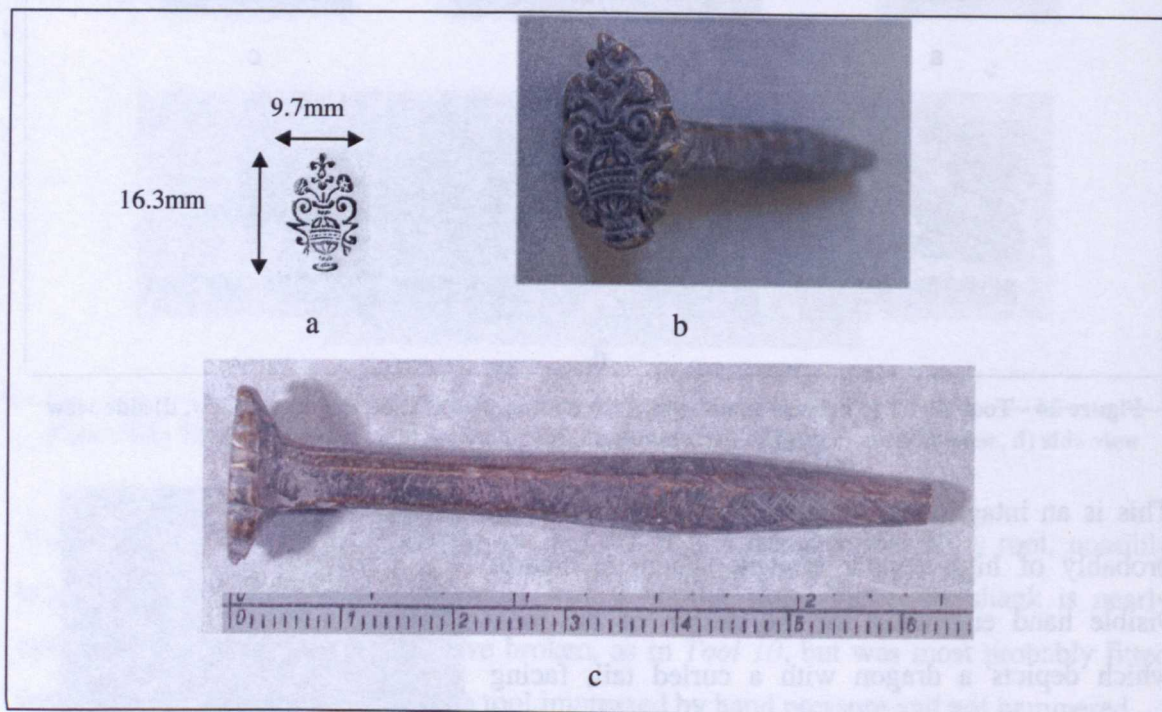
Tool 13: a) actual size smoke proof, b) photograph of face, c) side view
